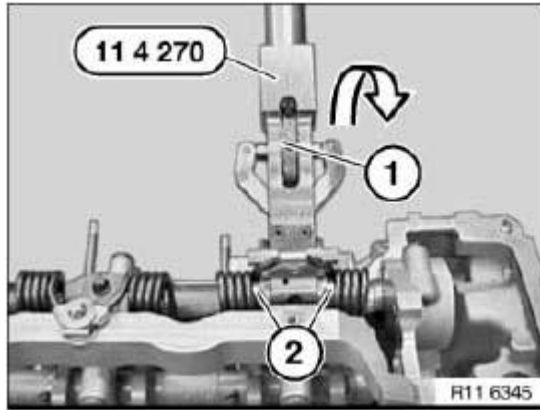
Identifying Special Tool (11 4 270), Screw And Bearing Pins
